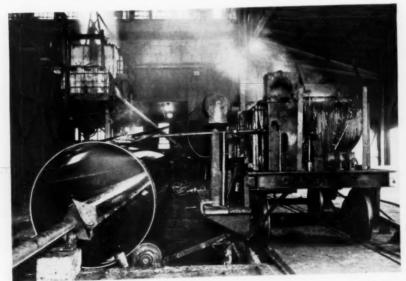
Single Trough in Pipe; showing outside coating car on right
